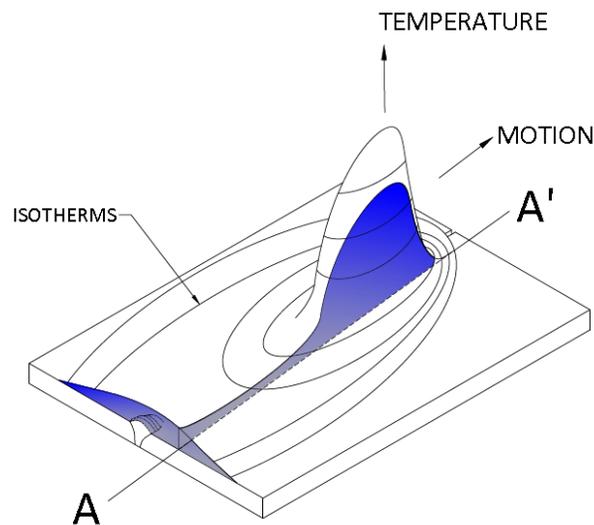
Temperature gradient along with the length of the weld joint
